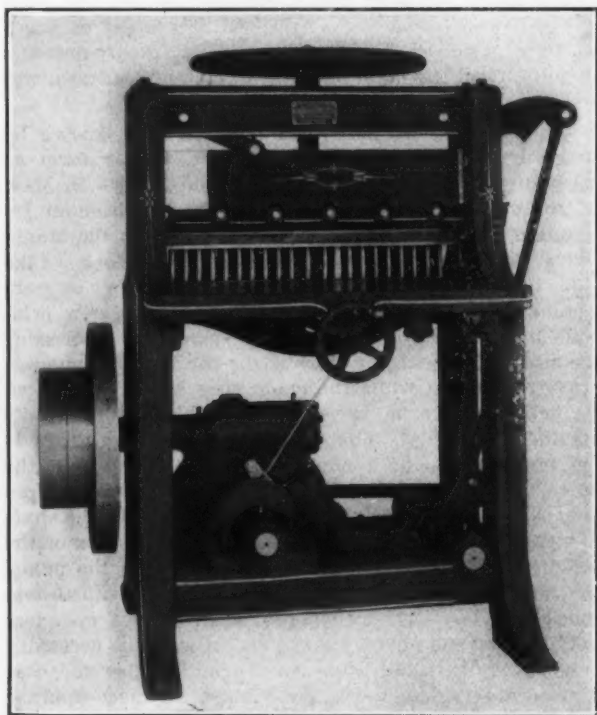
Paper Cutting Machine, Showing Clutch Mechanism of Which Detail Is Wanted.
